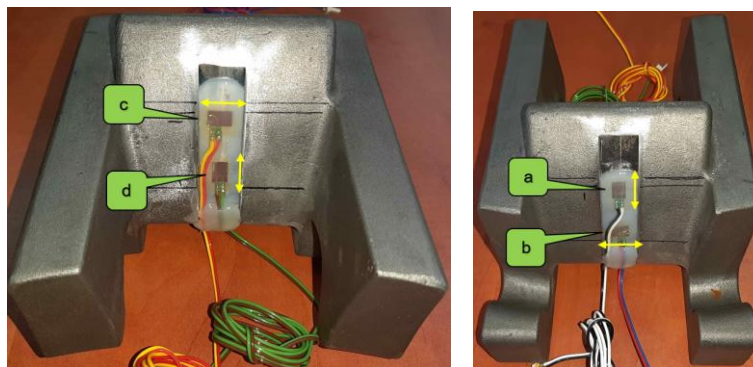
Toothed segment with four strain gauges glued on it (two on each tooth flank)
